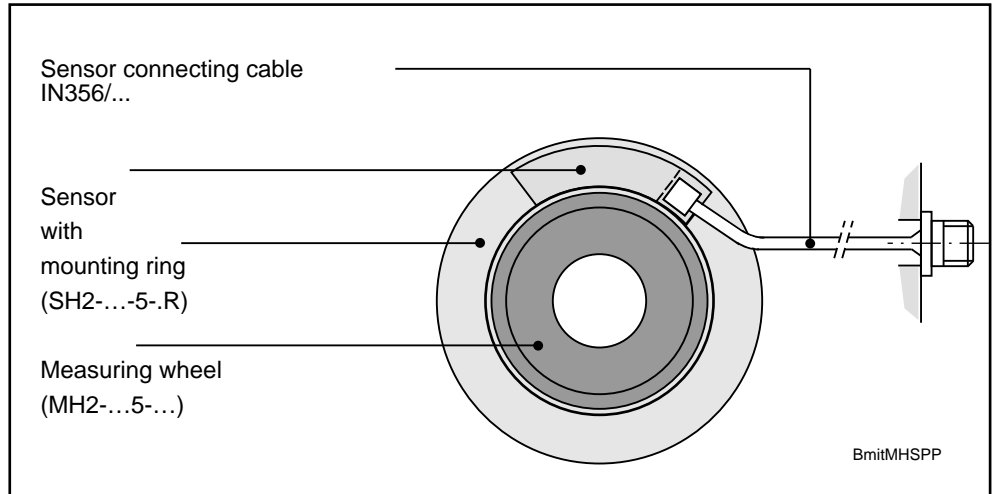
Parts of the high-resolution main spindle position encoder (with mounting ring)
